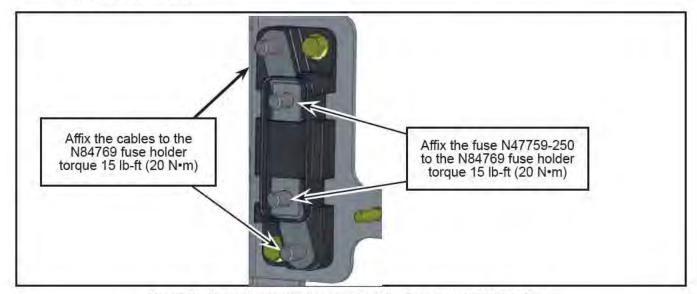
Torque for the Instalation of the Cables and N47759-250 Fuse
